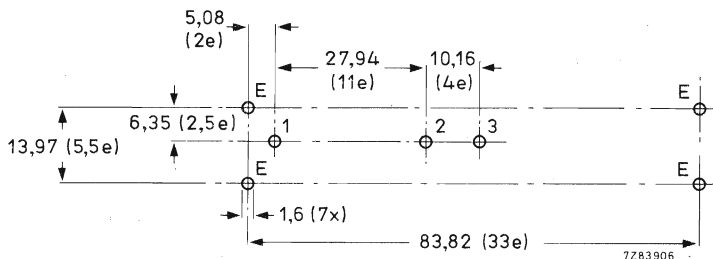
Piercing diagram viewed from solder side of board; $e = 2,54$ mm (0,1 in).
